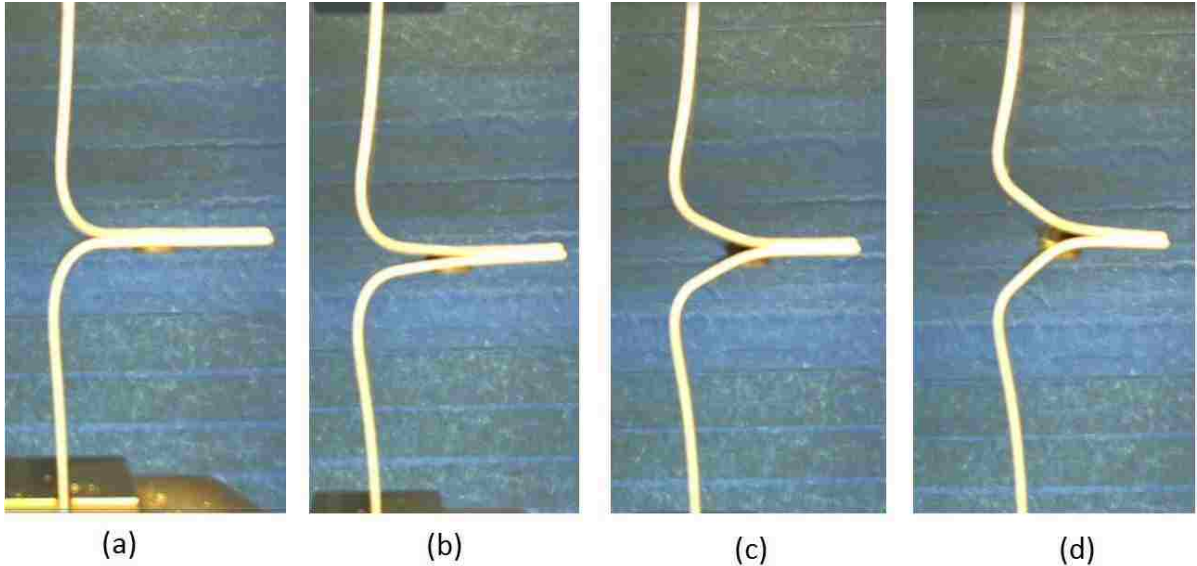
Tensile test of a 1.3 mm thick riveted coach joint, No adhesive; un-deformed shape (a), progressive deformation before peak load (b) and (c) and onset of material yielding before final failure (d).
